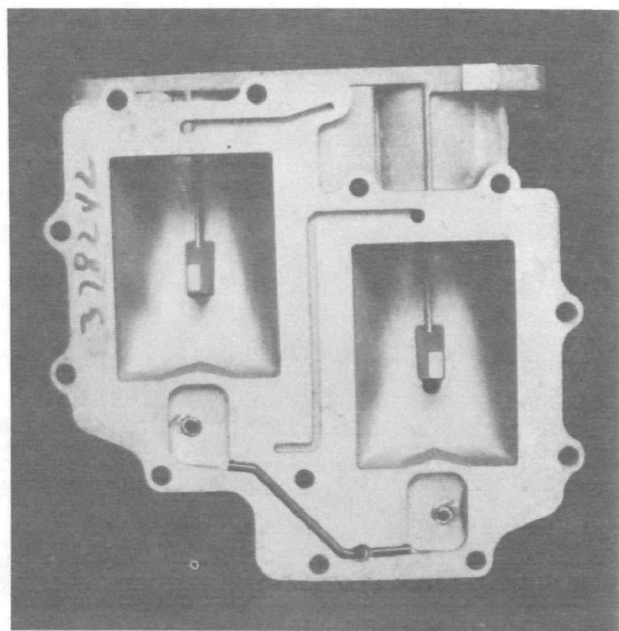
Modified OMC V-4 inlet manifold, showing blocked drain channel, two drain holes, and one return hole
